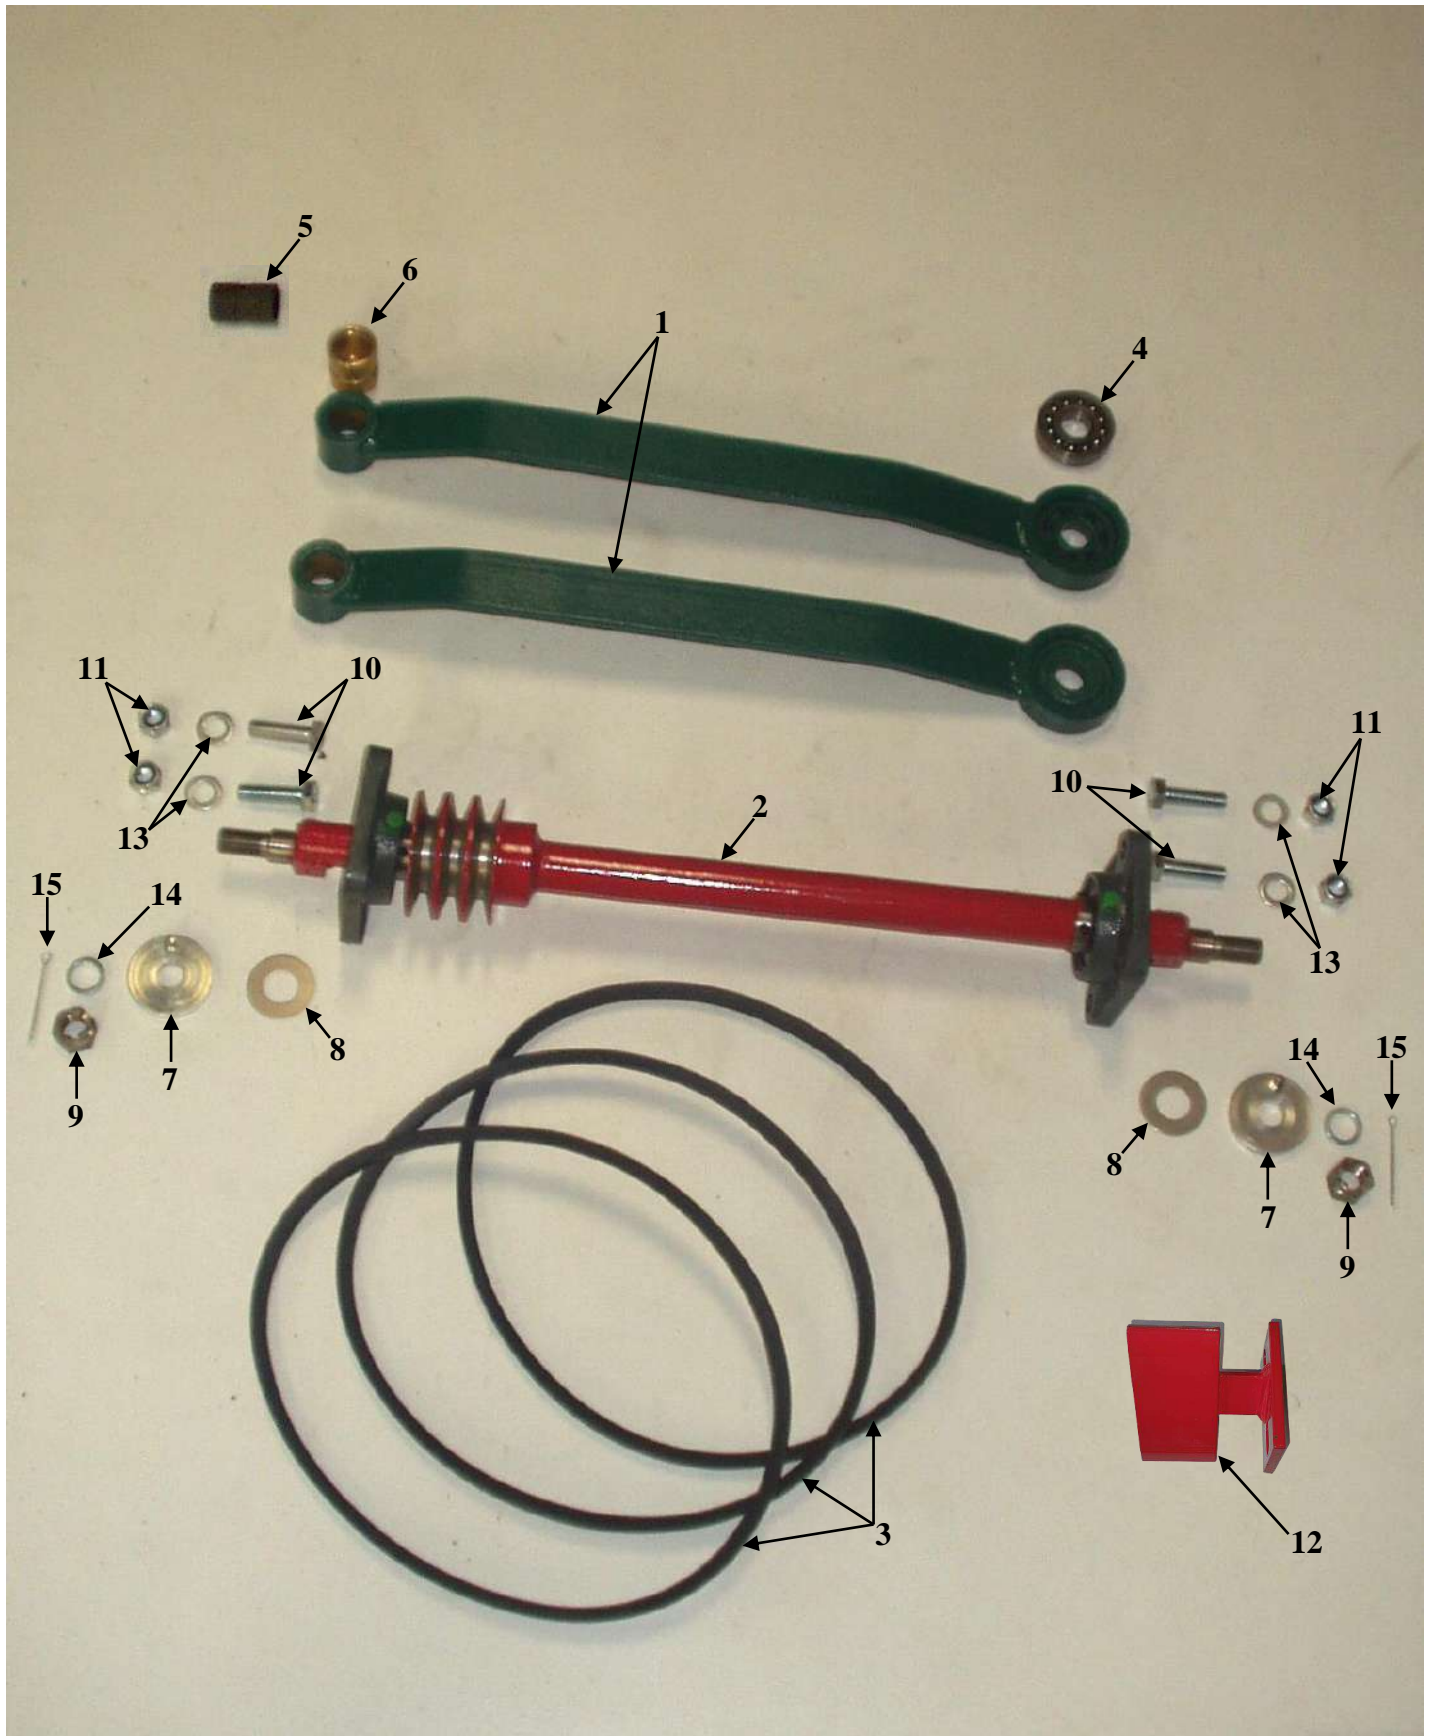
HEIGHT ADJUSTER LEVER ASSEMBLY
